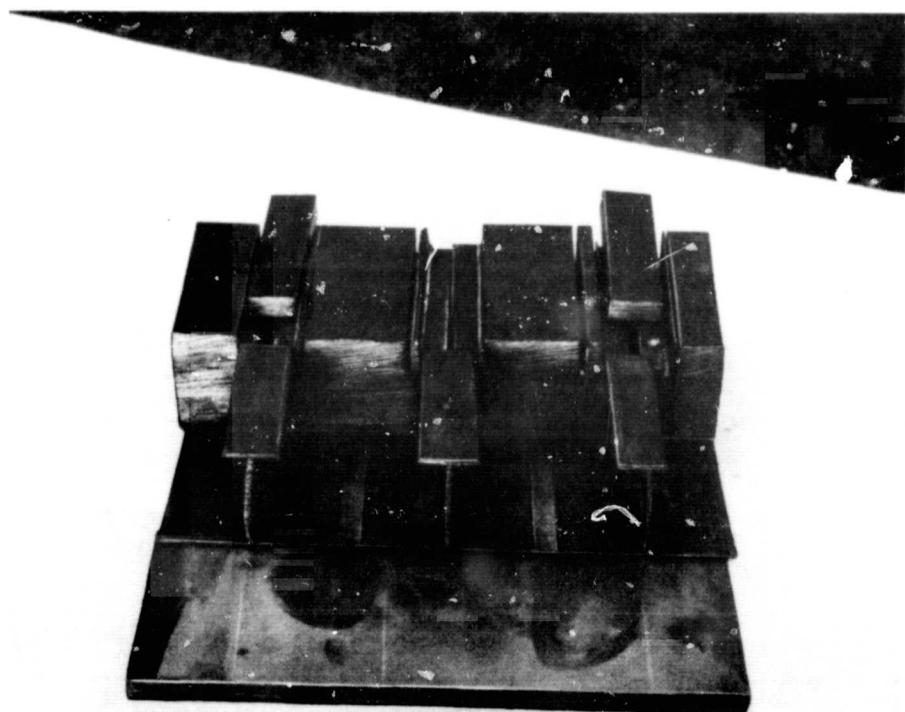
REMOVING TITANIUM PART FROM 4-INCH SECTION
